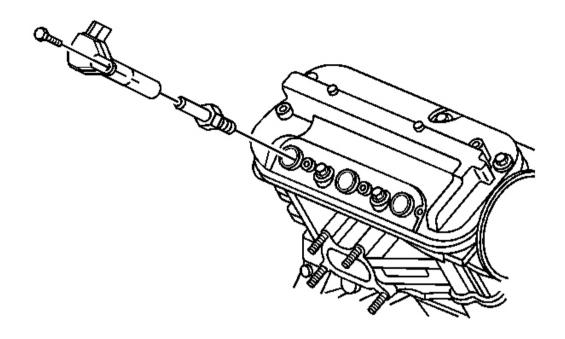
View Of Ignition Coils Courtesy of GENERAL MOTORS CORP.
